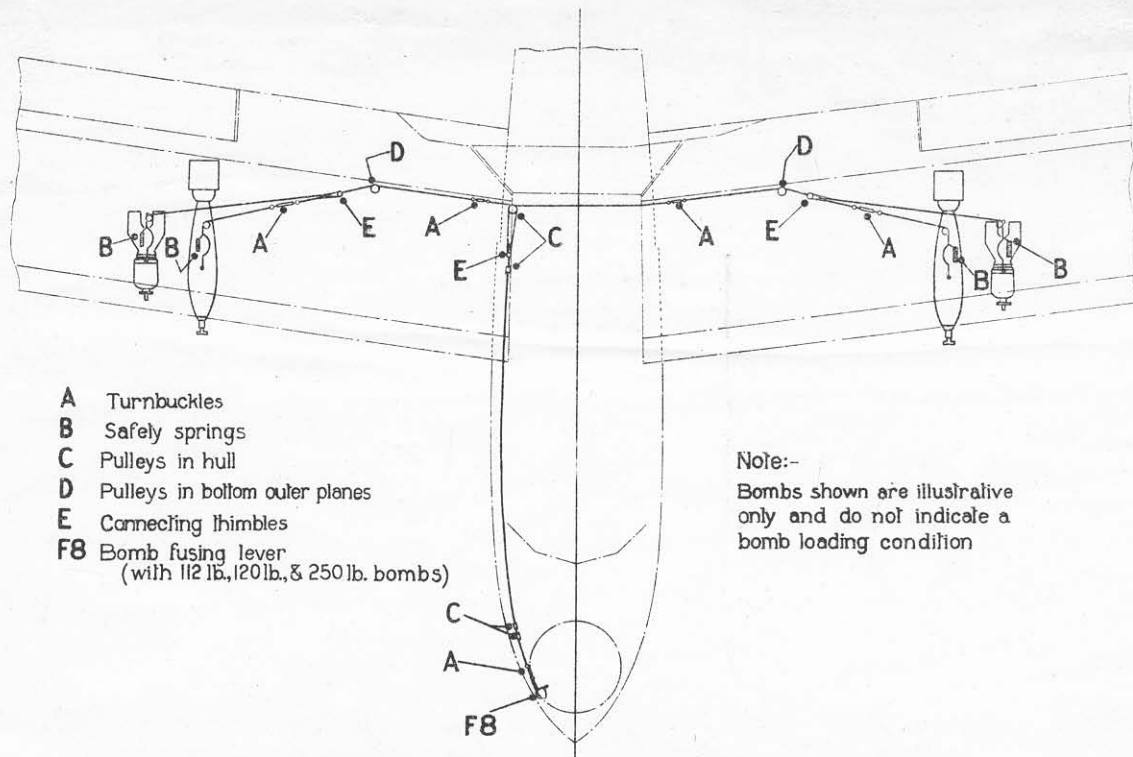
, ARRANGEMENT OF BOMB FUSING CABLES
